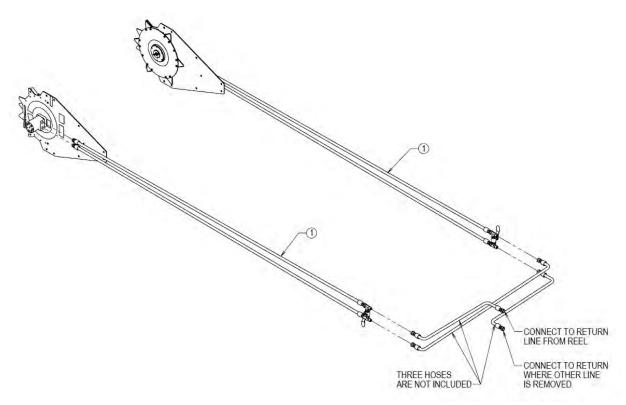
Roto-Shear Universal Hose Package (UHK15)
